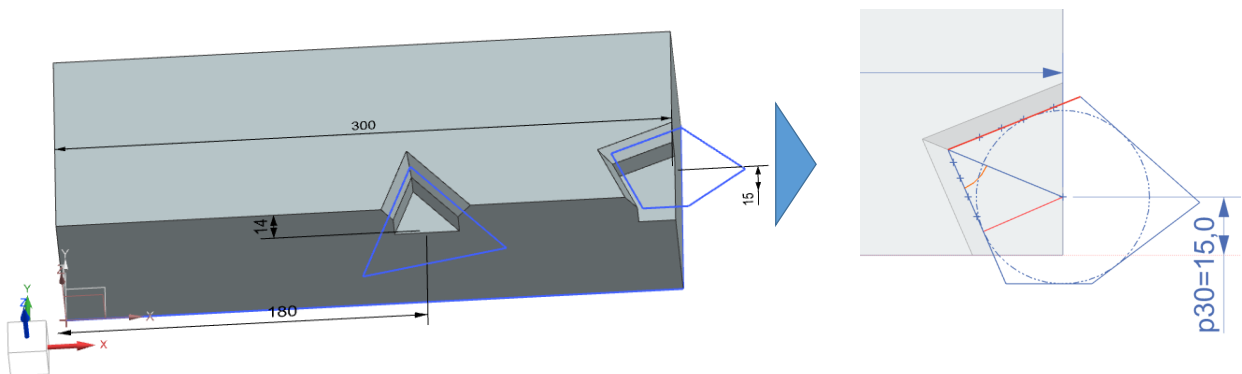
Sample part for execution CAIP for OMI at tool manufacturing company
